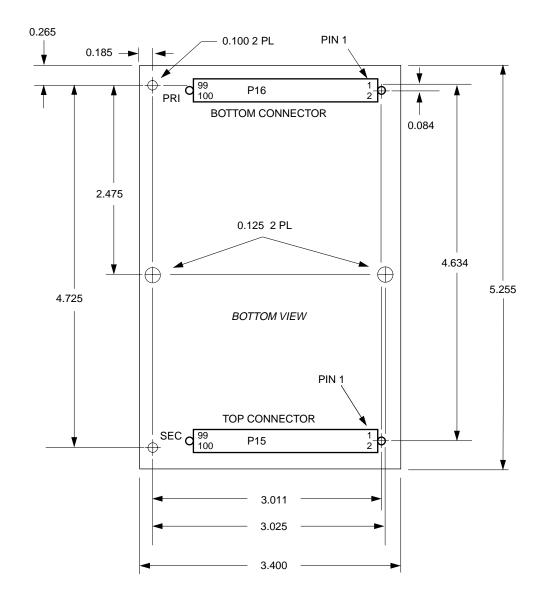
Mezzanine Board Dimensions (SRAM and ECC DRAM)
